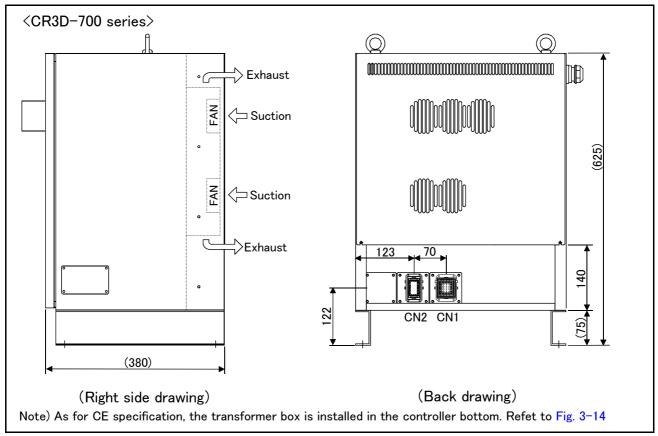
Outside dimensions of controller (CR3D-700 Supplement)
